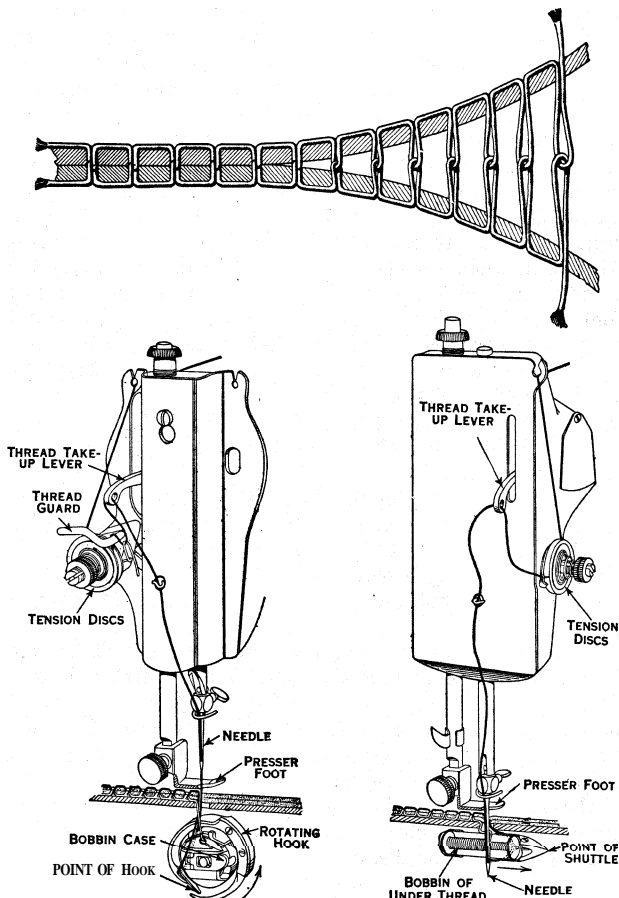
LOCK STITCH AS FORMED ON SINGER SEWING MACHINES. FIG. 2.—THE LOCK STITCH IN FORMATION. THE NEEDLE THREAD IS DEFINED IN BLACK AND THE UNDER THREAD SHOWN WHITE. FIG. 3.—COURSE OF THE THREAD IN A VIBRATING SHUTTLE MACHINE
